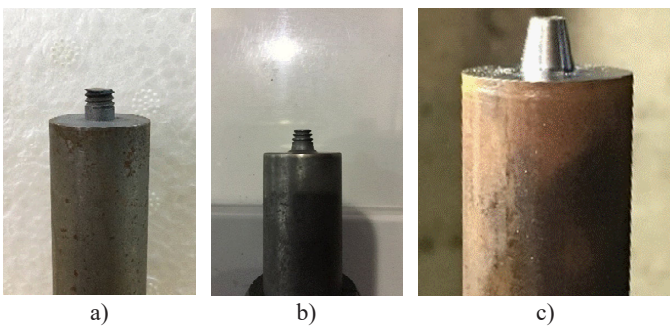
FSW tools geometry (a) Threaded straight cylindrical, (b) Threaded tapered cylindrical, (c) Tapered cylindrical
